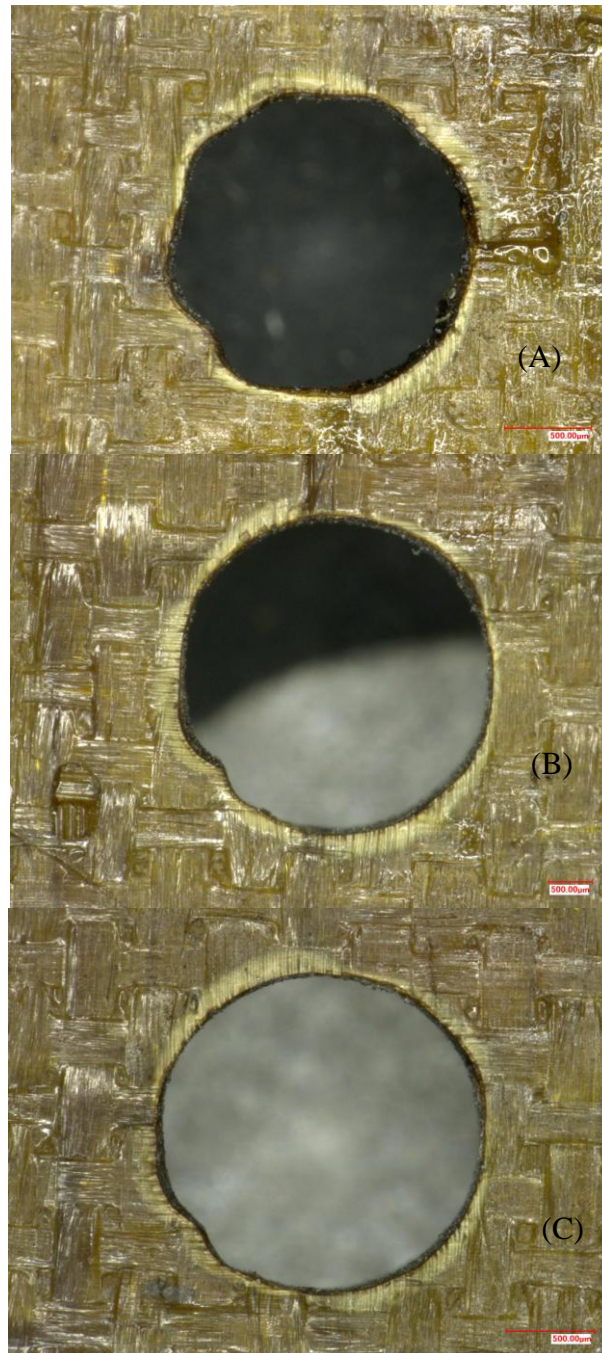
2mm diameter hole machined at different laser power: (A) 1200W, (B) 1500W, (C) 1800W.
